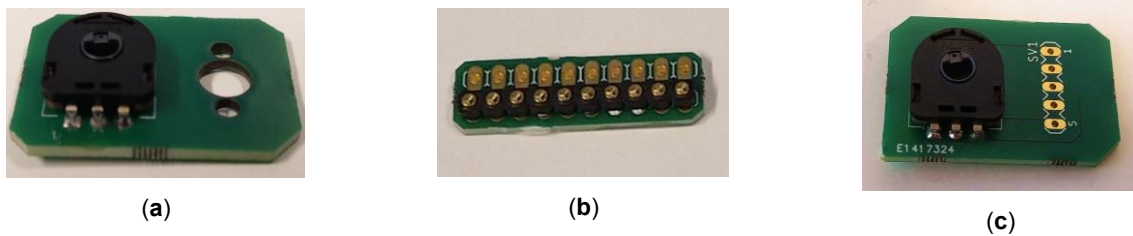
The custom-PCBs designed and fabricated for the resistance module: (a) motor and potentiometer board; (b) female pogo pin board; and (c) potentiometer board for the rotary part.
